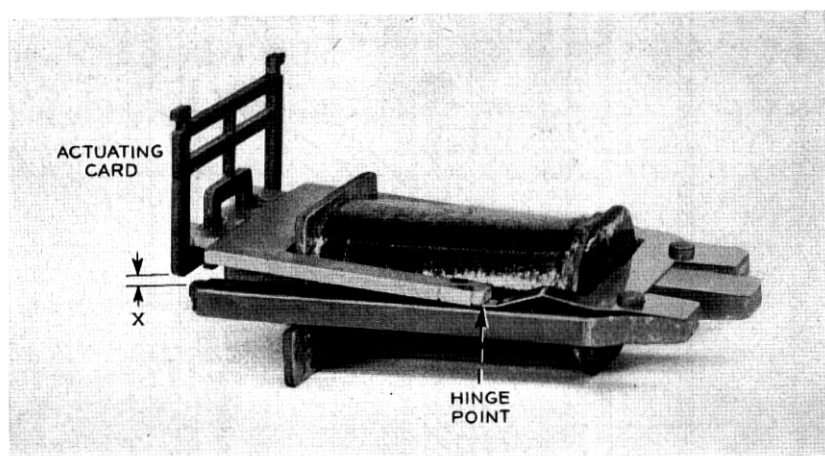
Magnetic parts, coil, and actuating card of AJ relay.
